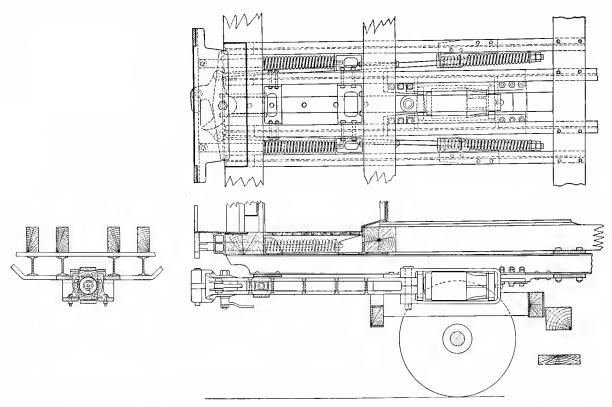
Westinghouse Friction Draft Gear for Passenger Train Cars with Standard Steel Platforms and Three Stem Couplers. Westinghouse Air Brake Company.
